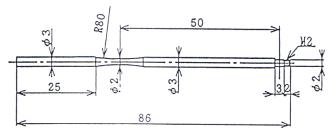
Shape and dimension of the specimen diameter of 2 mm
